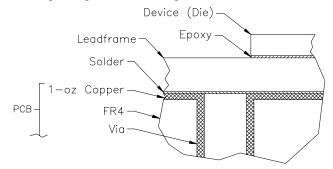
Mounting Configuration Cross-Section (molding compound not shown)
